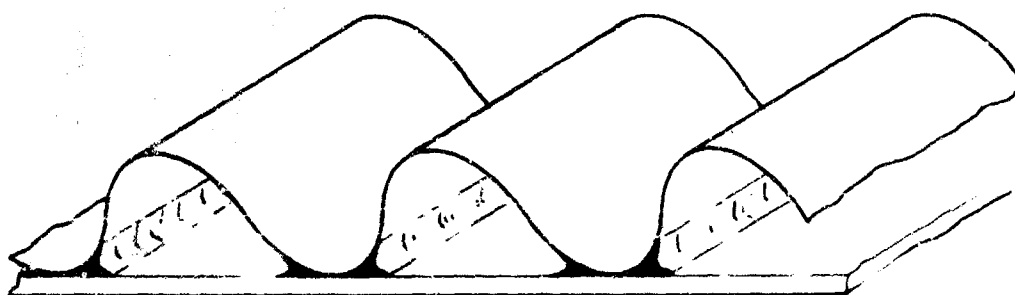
TYPICAL CORRUGATED FIN-TO-PLATE SHEET JOINTS
